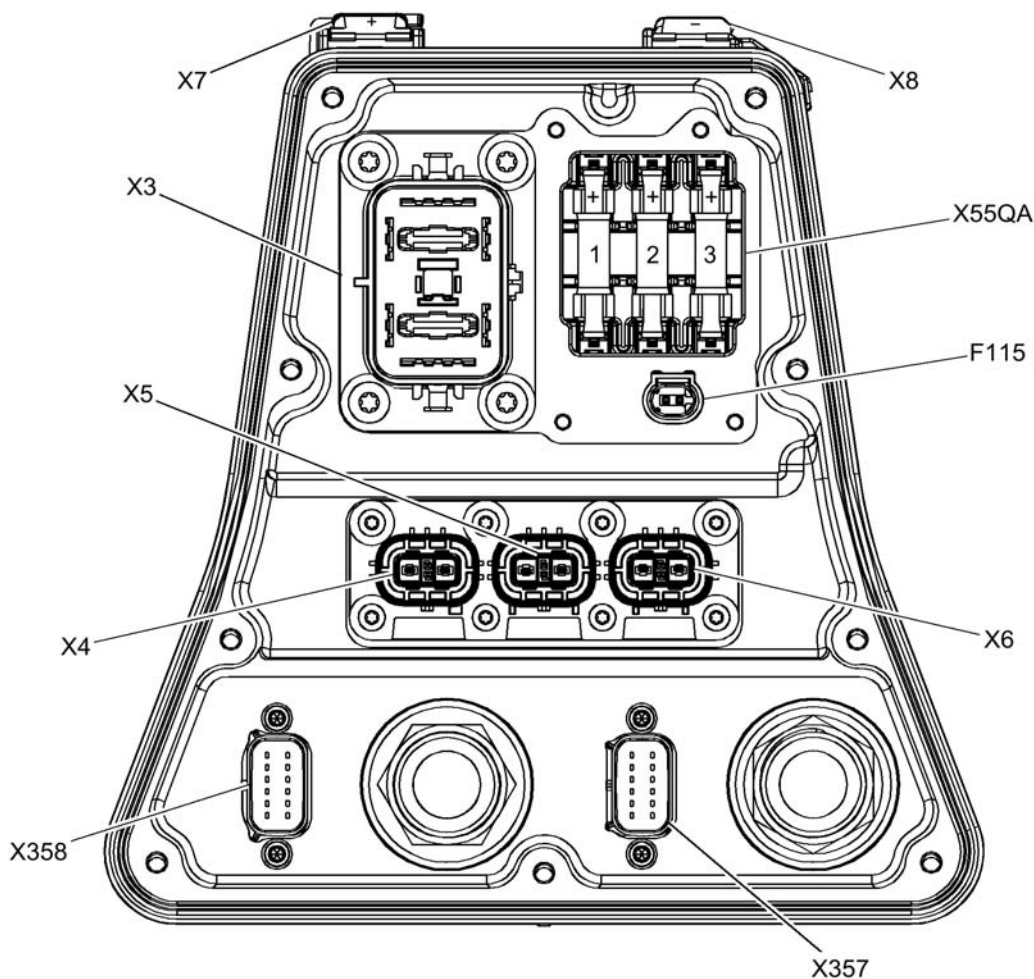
A28 Hybrid/EV Battery Contactor Assembly - Front View Fuses
